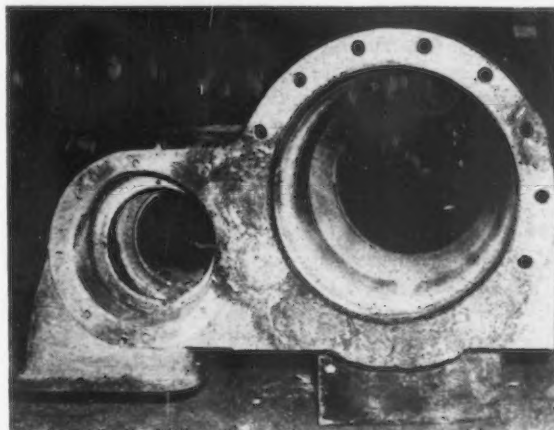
Top and front view of the steam chest showing weld repairs made to the flange. The flange thickness varied from 2 to $4\frac{1}{2}$ in.
